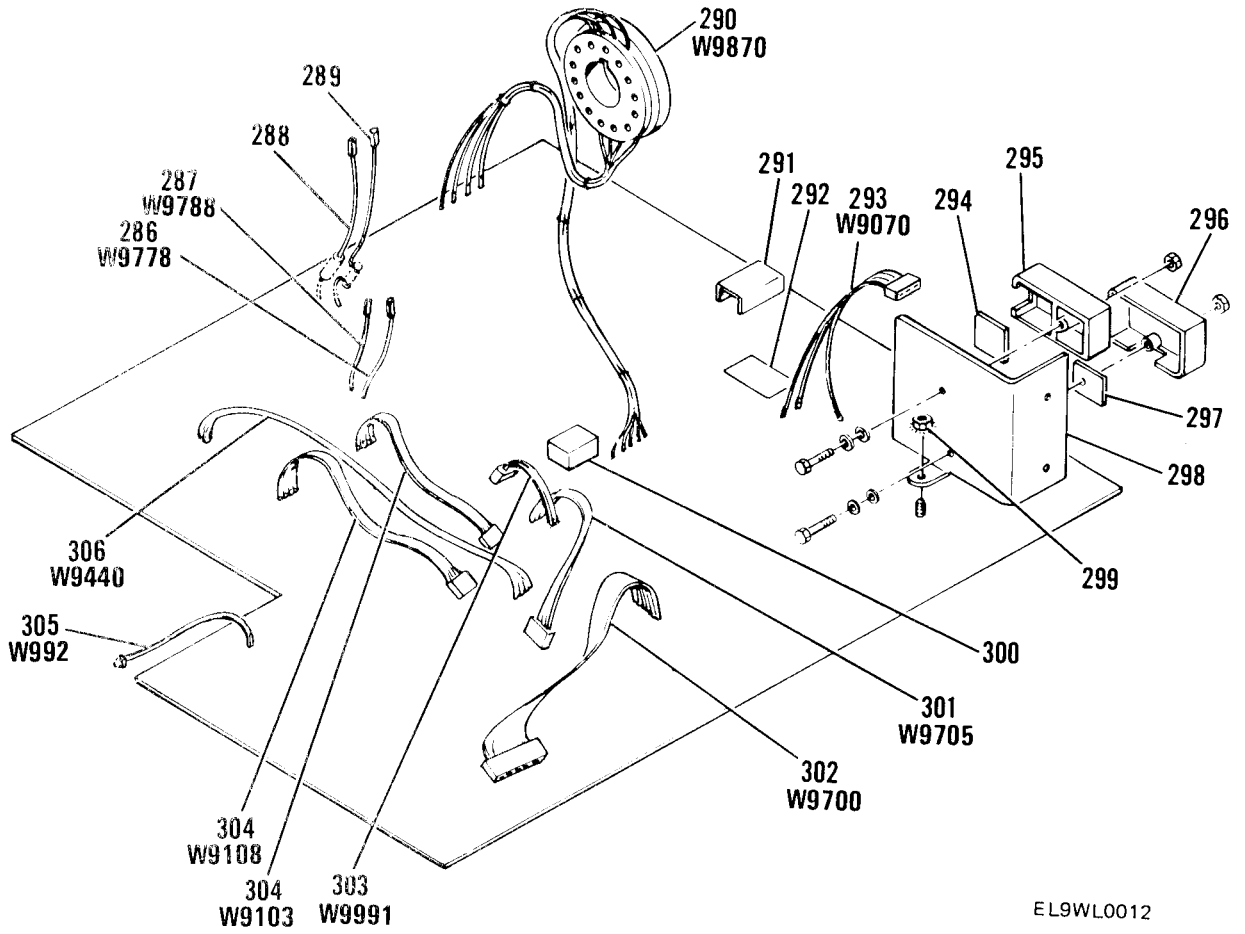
Circuit Card Assembly A1 (Sheet 3 of 11)
